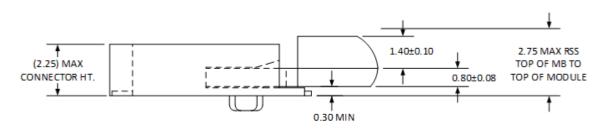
H2.3-S3 - Stack-up Top Mount Single-sided Module for 1.50 Maximum Component Height
